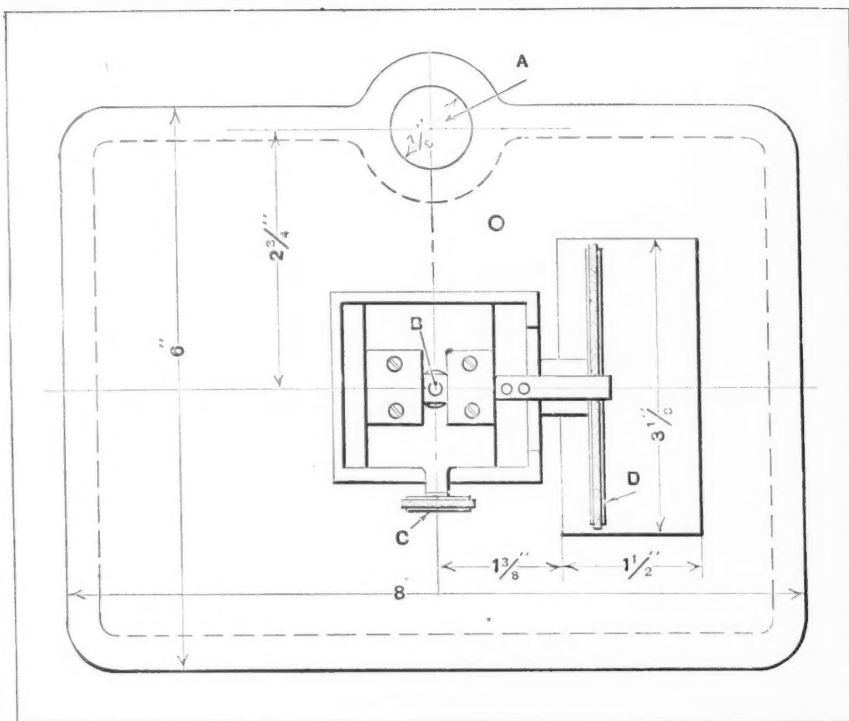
Plan View of Base and Holder for Fluid Gage for Hair-spring Wire
